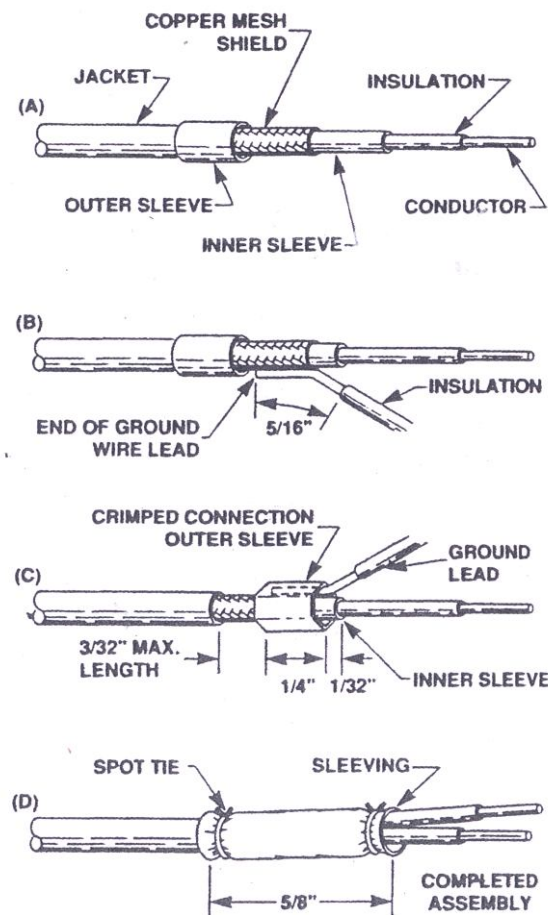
Attachment of a ground lead to a shielded wire using a crimped-on sleeve.
